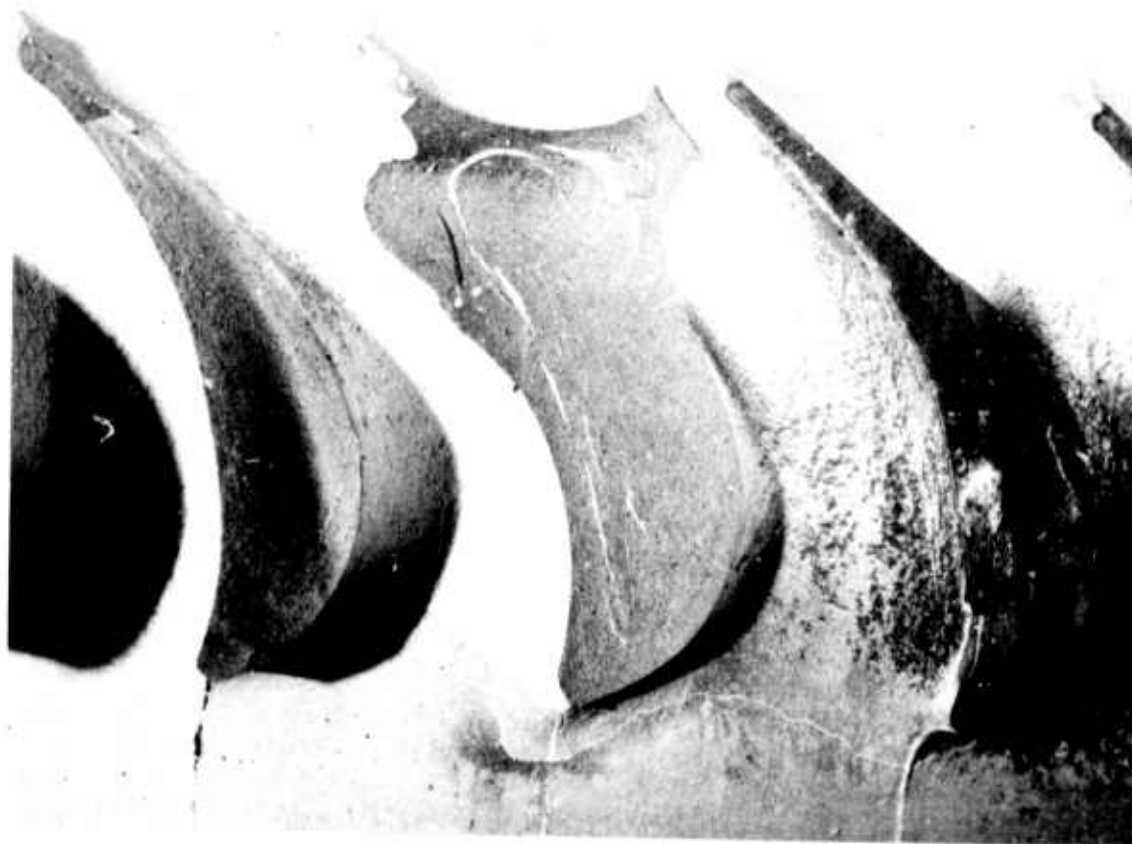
Fracture Surface at Base of Rotor Blade Showing Folds or Knit Lines
